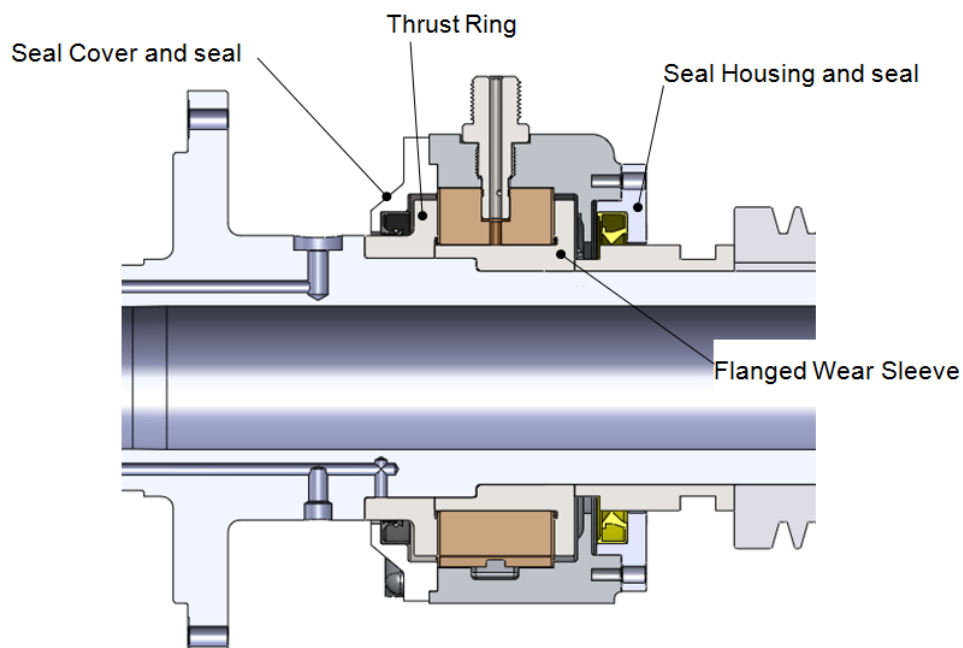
Solids end fluid film bearing for radial load and axial location
